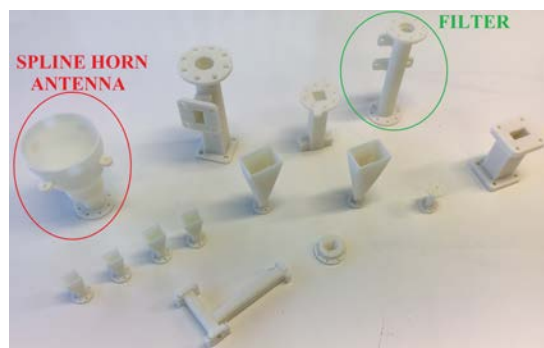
Manufactured components after being 3D printed and processed. Spline horn antenna and filter are indicated in the picture.
